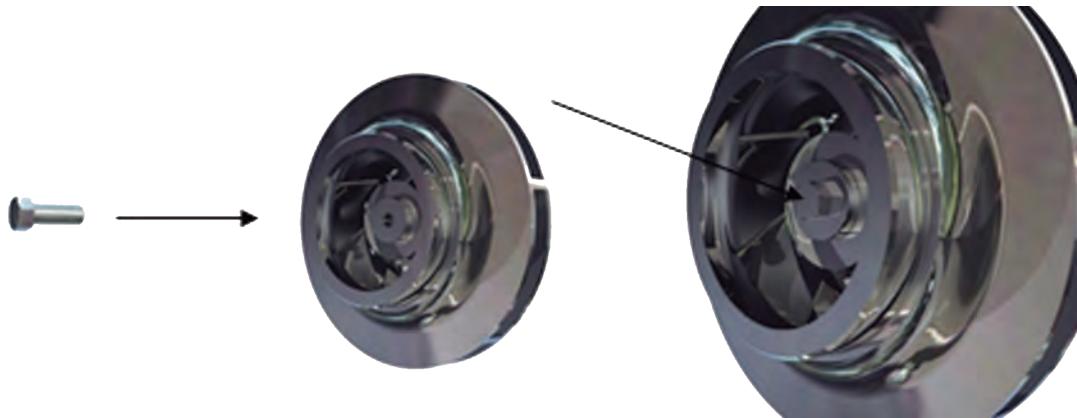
Tightening the impeller screw into the shaft's impeller side.
